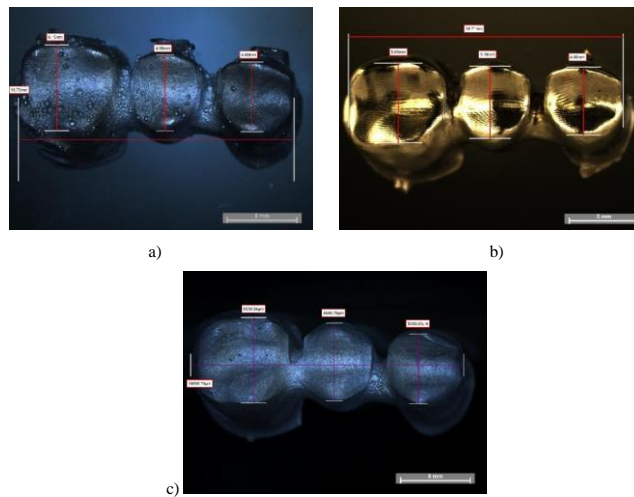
Macroscopic image representing the dimensional analysis of experimental samples obtained by: a) classical casting; b) milling; c) selective laser melting – lower view
